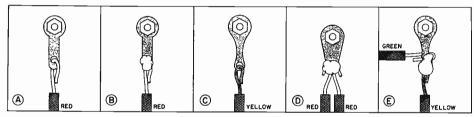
These illustrations show essential features of various soldering lug connections. A—Permanent hook joint with solid wire, before soldering; B—Permanent hook joint with solid wire, after soldering; C—Permanent hook joint with stranded wire, before soldering; D—Two temporary hook joints to a lug with solid wire, after soldering; E—Two permanent hook joints to a lug, after soldering.
